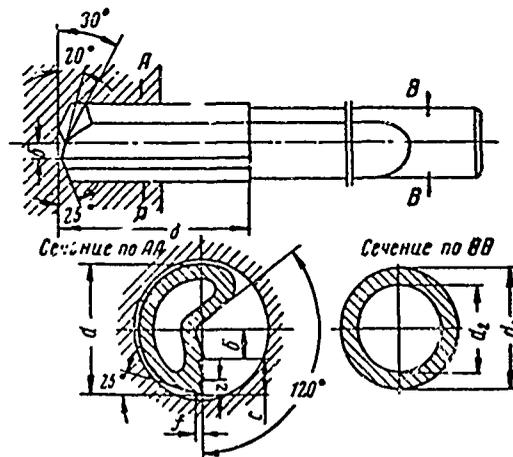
One-sided cutting drill with exterior shaving exhaust
